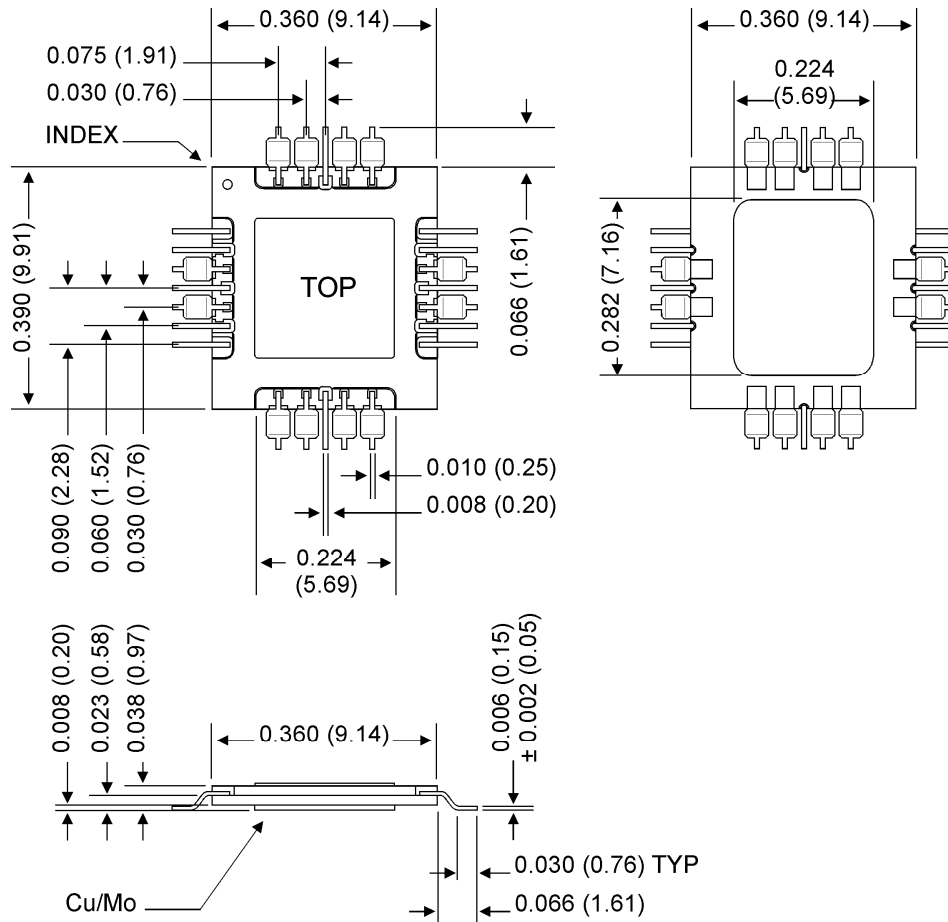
RTH090-HQ package outline, dimensions in inches (mm).
